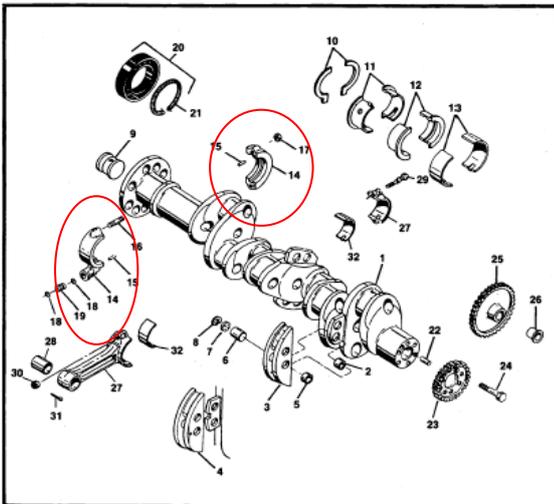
CRANKSHAFT ASSEMBLY
